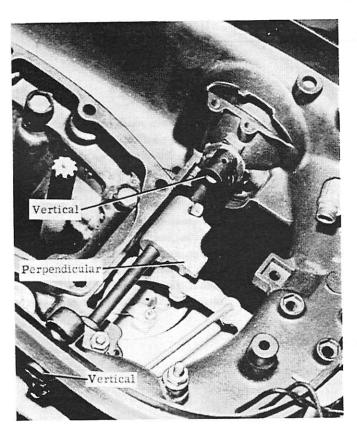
Throttle and Shift Lock Drum and Cross Shaft Lever
